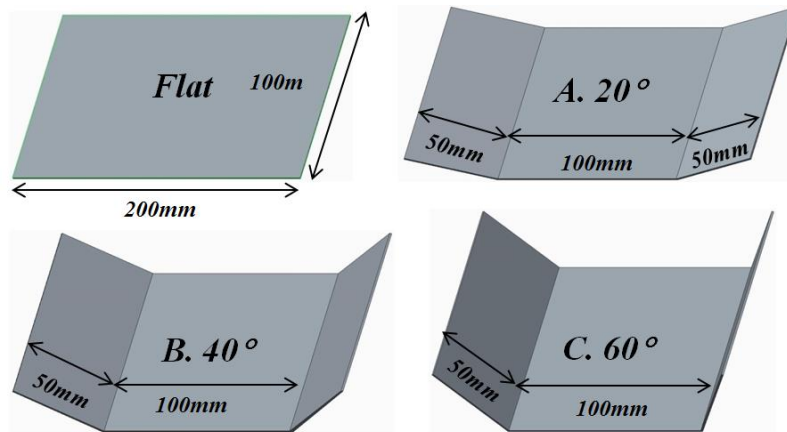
CAD drawings of the target shapes, “U” shape with 20°, 40° and 60° target bending angles
